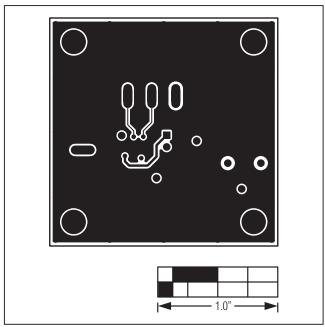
MAX97200A EV Kit PCB Layout—Layer 3
